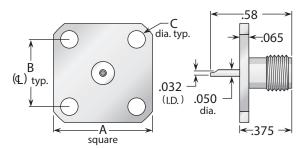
(11/16" square flange, interchangeable with BNC and TNC standard flange size)
